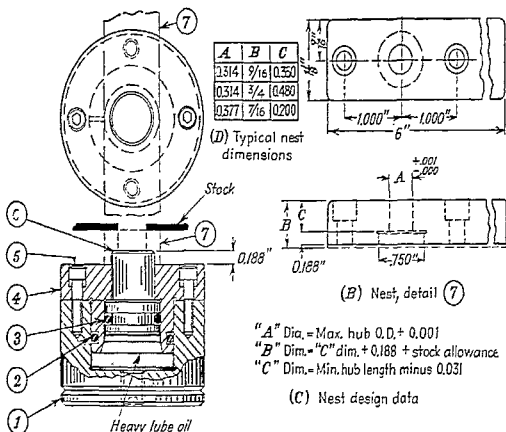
Hydraulic compensating staking die; (A) assembly; (B) nest, detail 7; (C) nest design data; (D) typical nest dimensions. (National Cash Register Co.)
